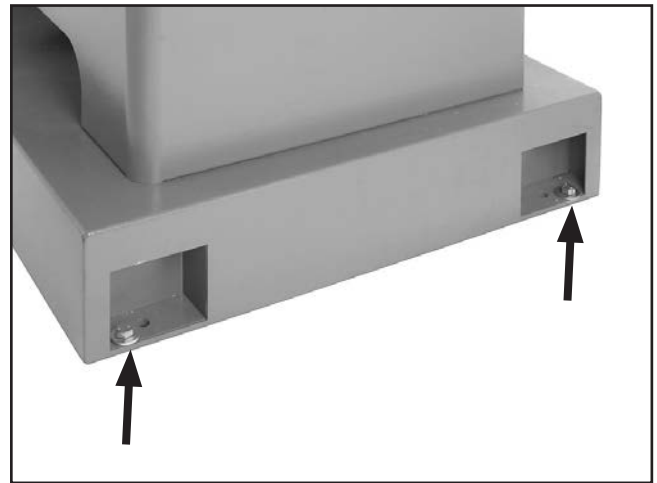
Example of where machine is bolted to the pallet (only one side shown).
